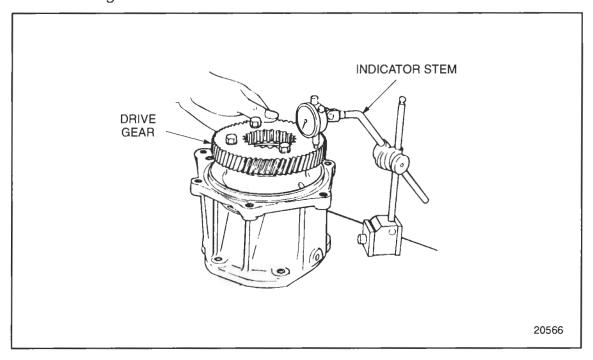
Measuring Air Compressor Drive Gear TIR
